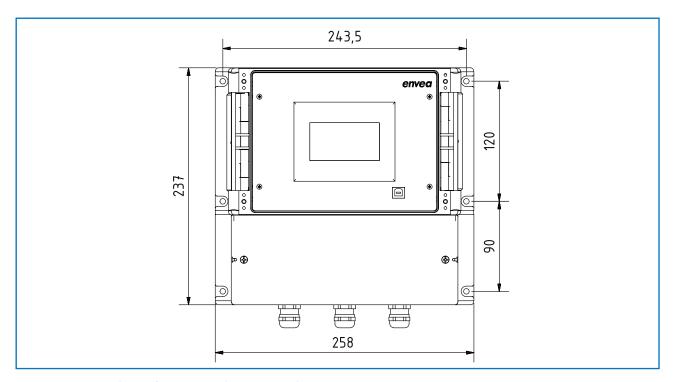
Dimensions of the MSE 300 in the field housing (front view)
